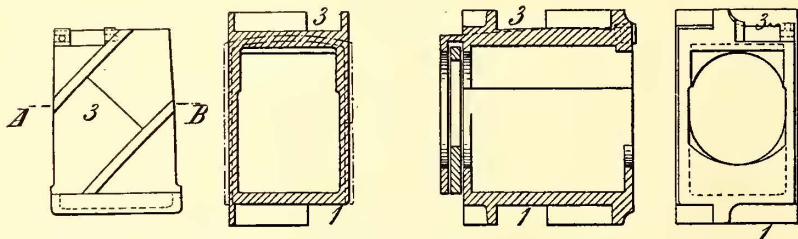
PLAN, SECTION ON *AB*, LONGITUDINAL SECTION AND FRONT ELEVATION OF INNER AXLE-BOX
